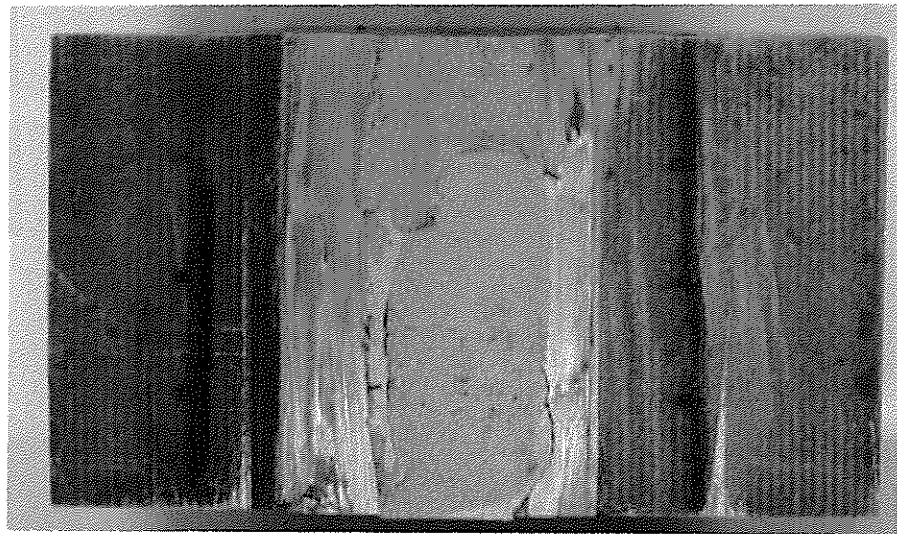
Fracture surface and pass after fracture toughness test (FTI-3, -105°C)
